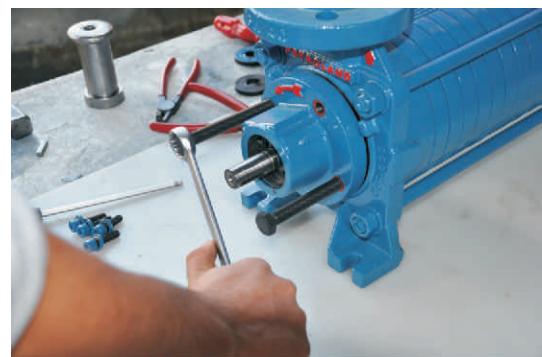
Shows pulling the mechanical seal casing by using puller bolt.
